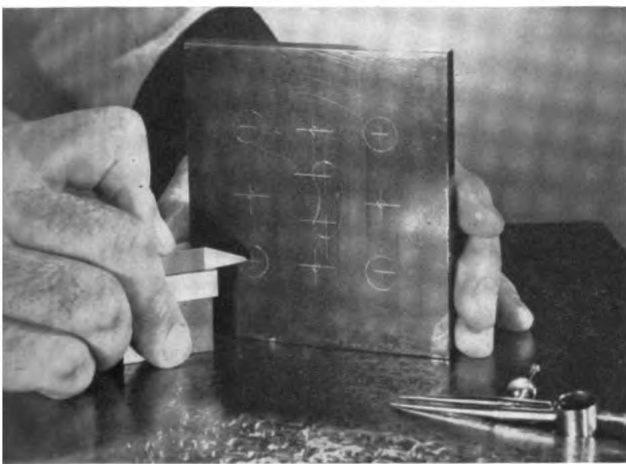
Surface plate inspection is closely related to toolmaker's locating methods.
